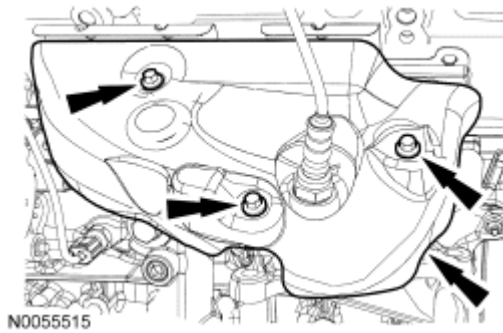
Locating LH Exhaust Manifold Heat Shield & Nuts
